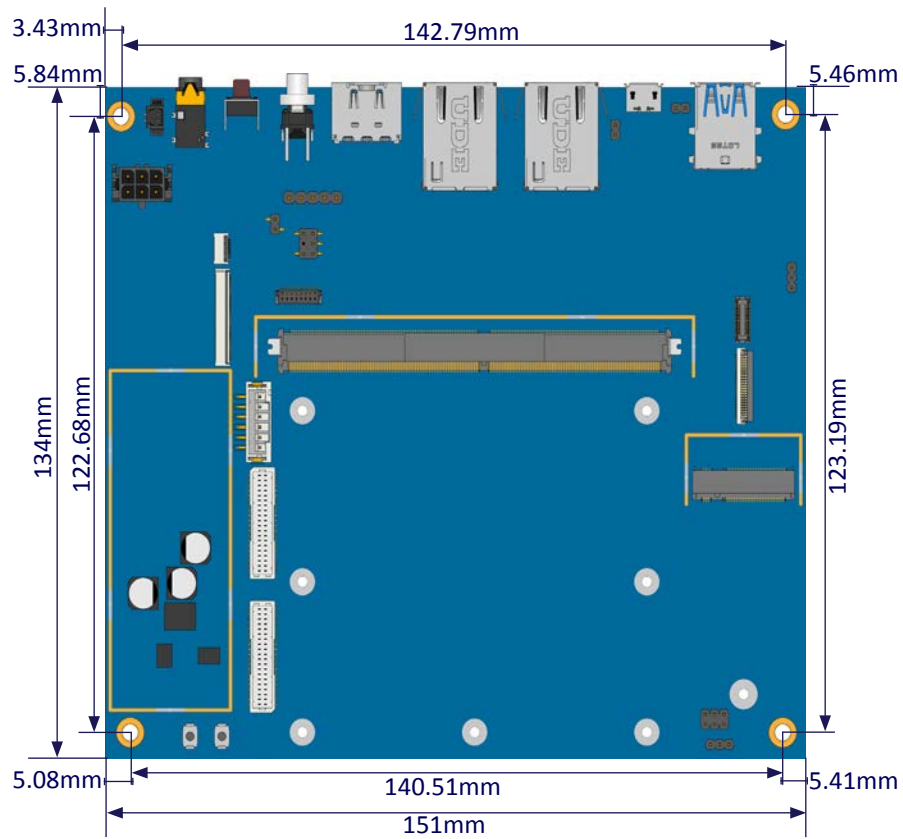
Dimensions of the VIA SOMDB7 carrier board (top I/O)
